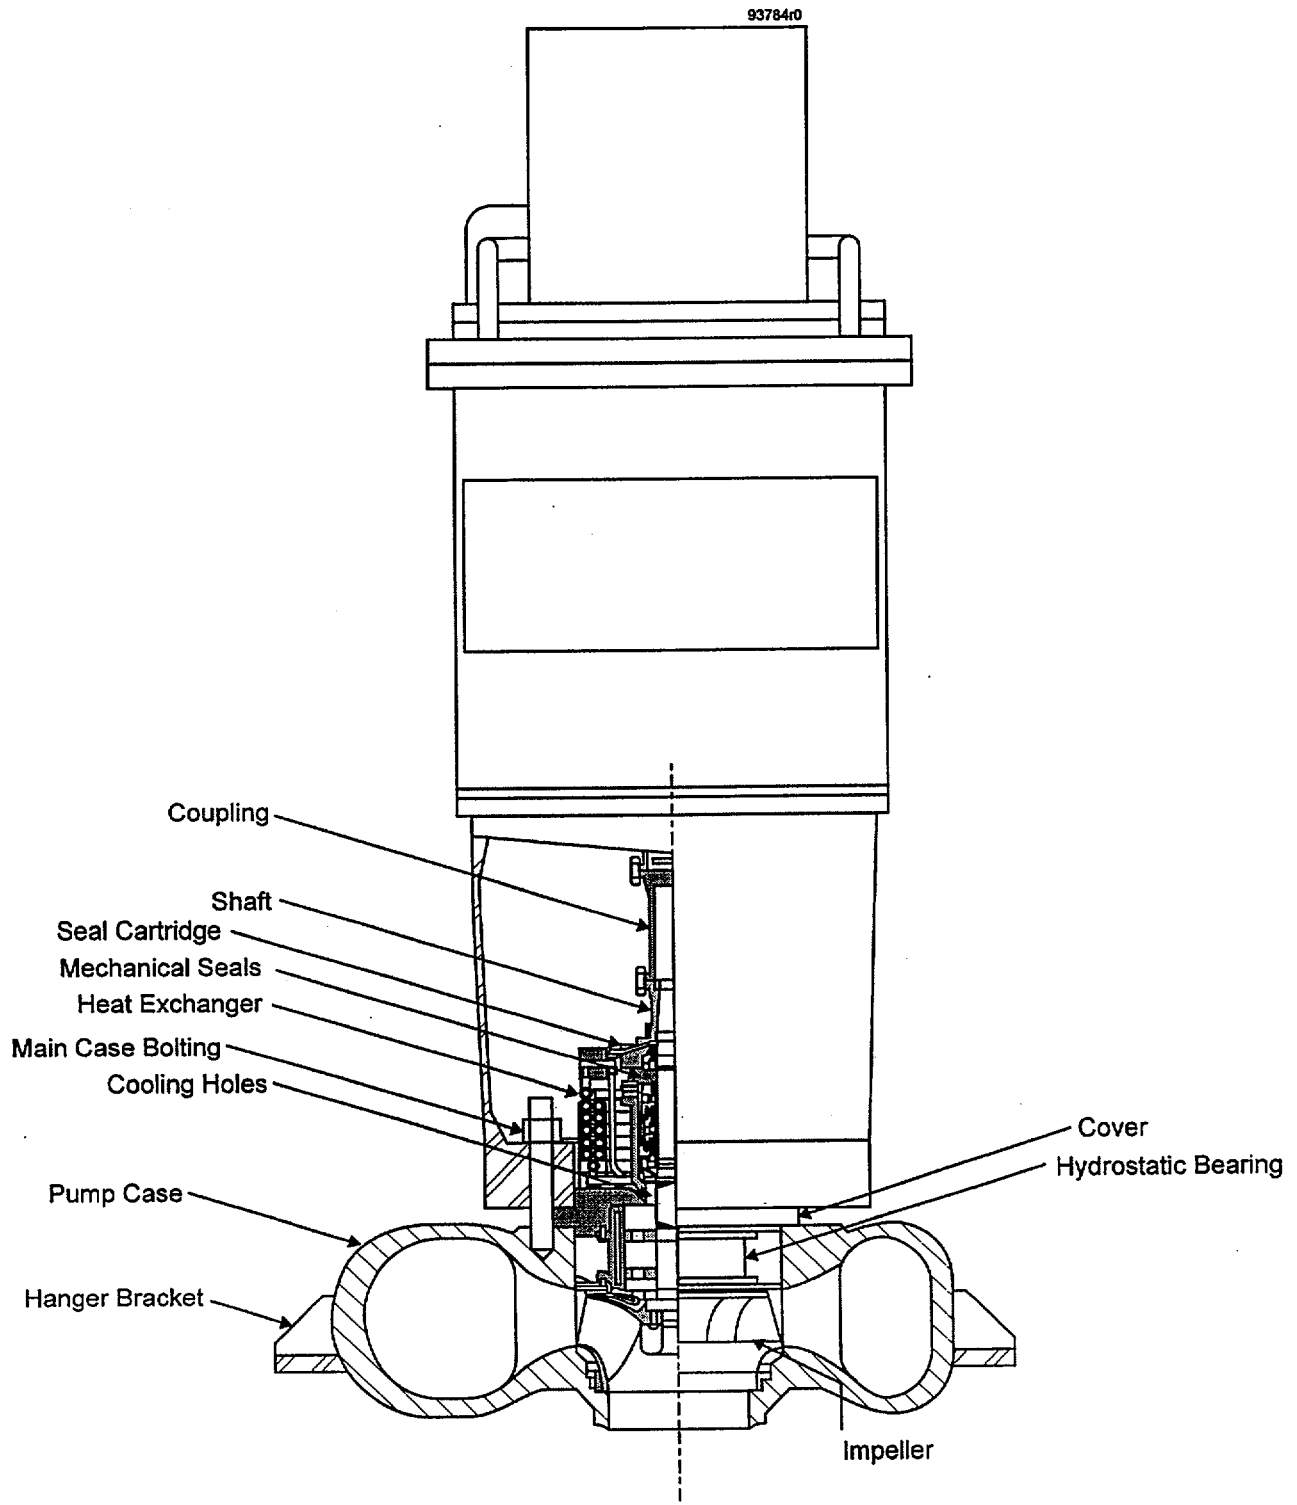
Davis-Besse Reactor Coolant Pump Assembly [4]
